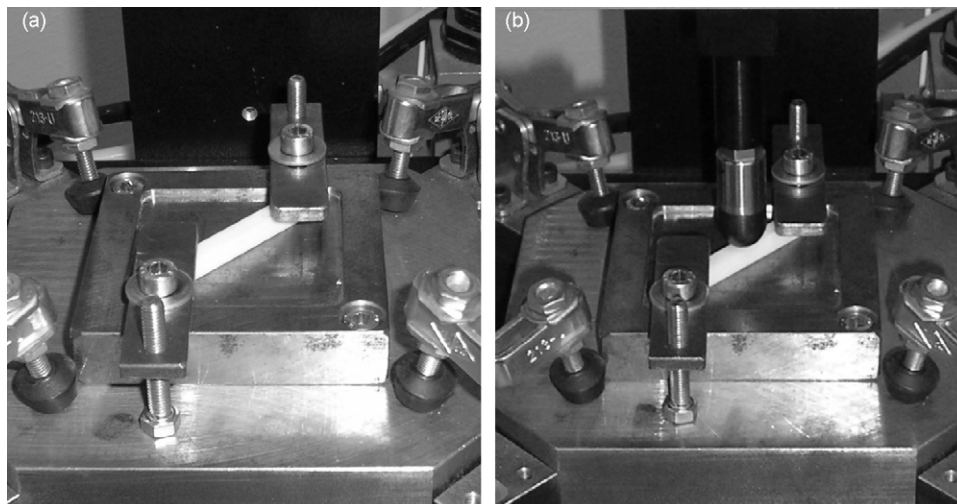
Detail of the square support fixture assembly of flat edges constructed to hold the samples. The specimens dimensions were bars of 50 mm × 4 mm × 6 mm (a). The tip of the impactor is hemispherical and has a diameter of 12.7 mm (b).
